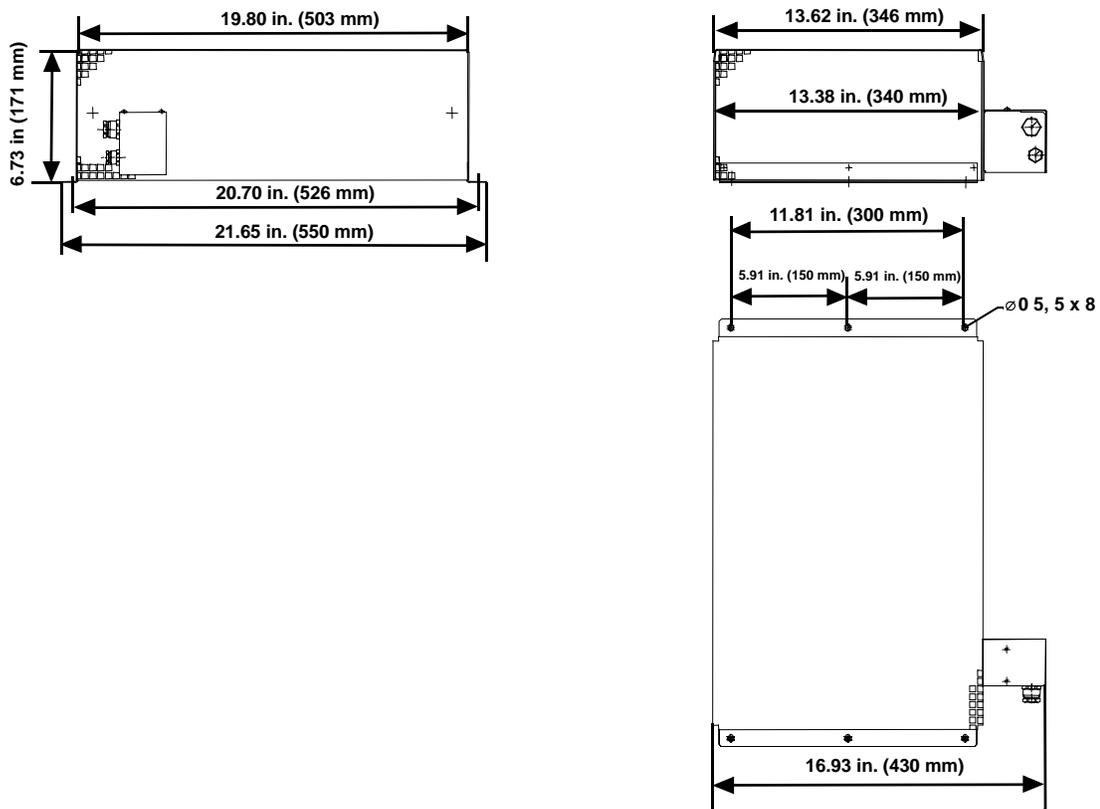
Mounting Dimensions for 460V External Shunt (P/N M.1302.7063)
